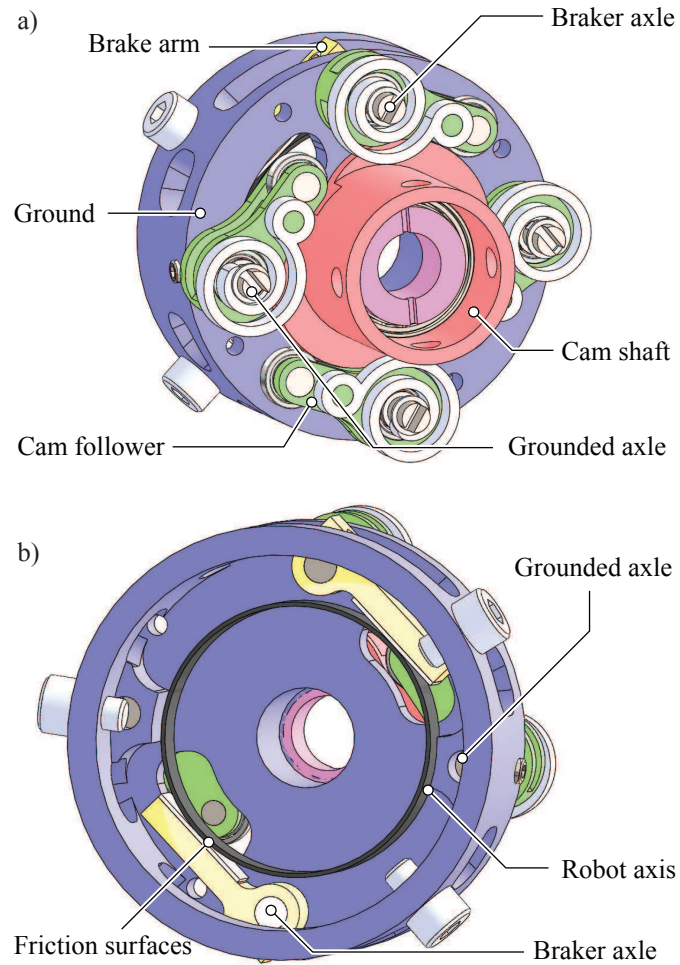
Two CAD drawings of the second embodiment. a) An inside view of the embodiment with torsion springs. b) The back side of the embodiment with torsion springs showing the connection with the braking arms. Four followers (shown in green) roll over the surface of the cam (shown in red). Two connect to the ground (shown in blue) and two connect to the brake arms (shown in yellow). The brake arms then push against a ring on the robot axis (shown in black). (For interpretation of the references to color in this figure legend, the reader is referred to the web version of this article.)
